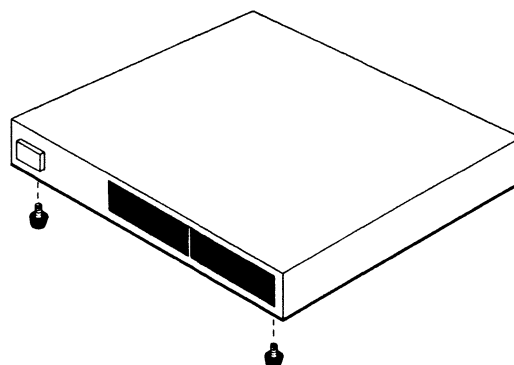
Remove the Pro Disk's bottom mounting feet.
